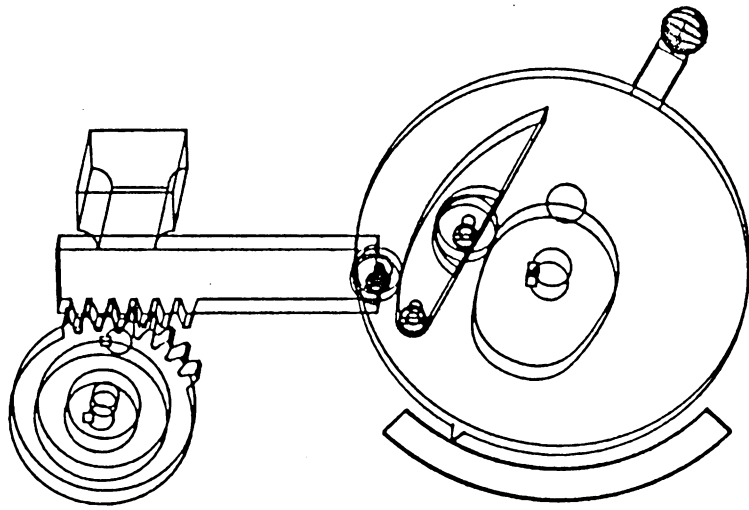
A Completed Blakemore Drive Mechanism with a Gear
